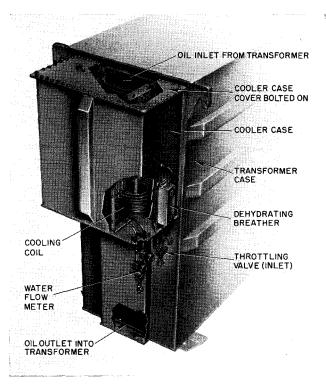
Cutaway View of "OW" Cooler Integrally Mounted on Transformer.
